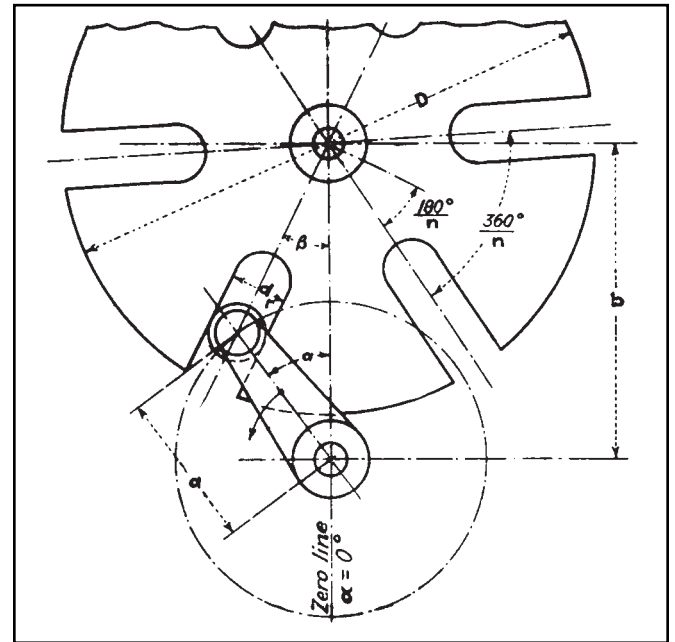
A schematic drawing of a six-slot Geneva wheel. Roller diameter, d_r , must be considered when determining D .
